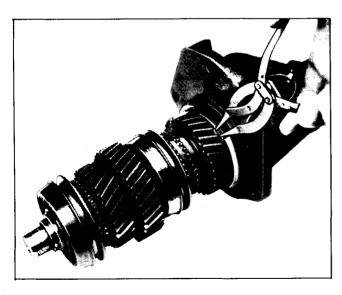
B-10 Separating Extension Housing From Mainshaft Assembly
